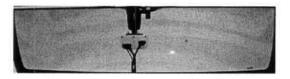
Extracted Image after cutting off unnecessary Parts
